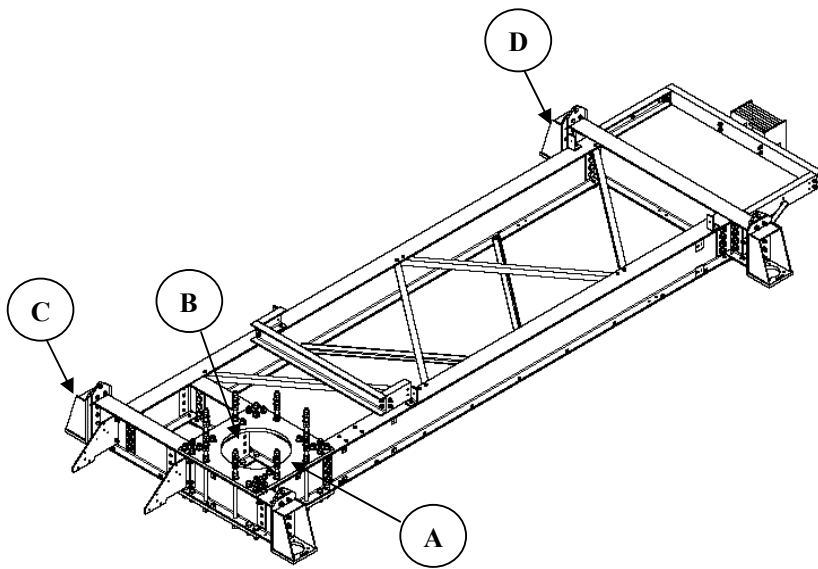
Core module frame indicating parts to be removed for conversion to Space Saver
